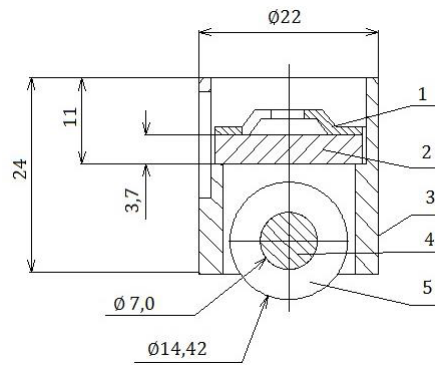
Measurement parameters of the roller handle. 1. Spring stop disc, 2. Adjusting pad, 3. Jack body, 4. Roller shaft, 5. Roller.
